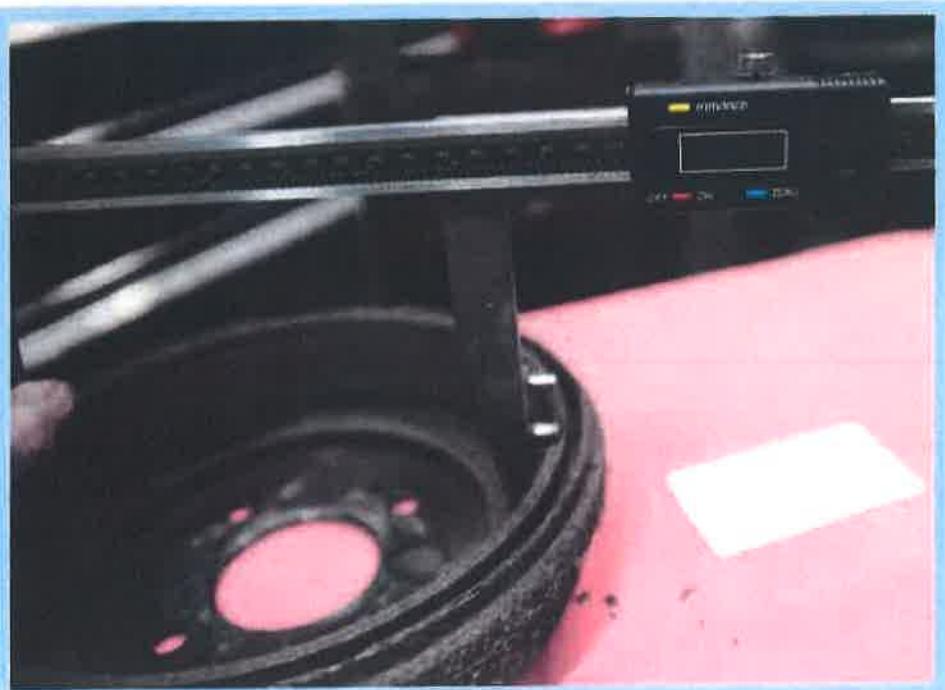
This photograph depicts the brake drum located at the right rear of the 2000 Honda Civic. Wear measurement readings of the brake shoe contact areas of the brake drum exceeded minimum specifications.
